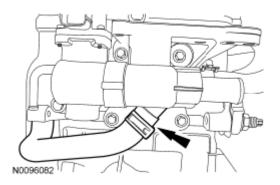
Locating Coolant Outlet Bypass Hose Courtesy of FORD MOTOR CO.
